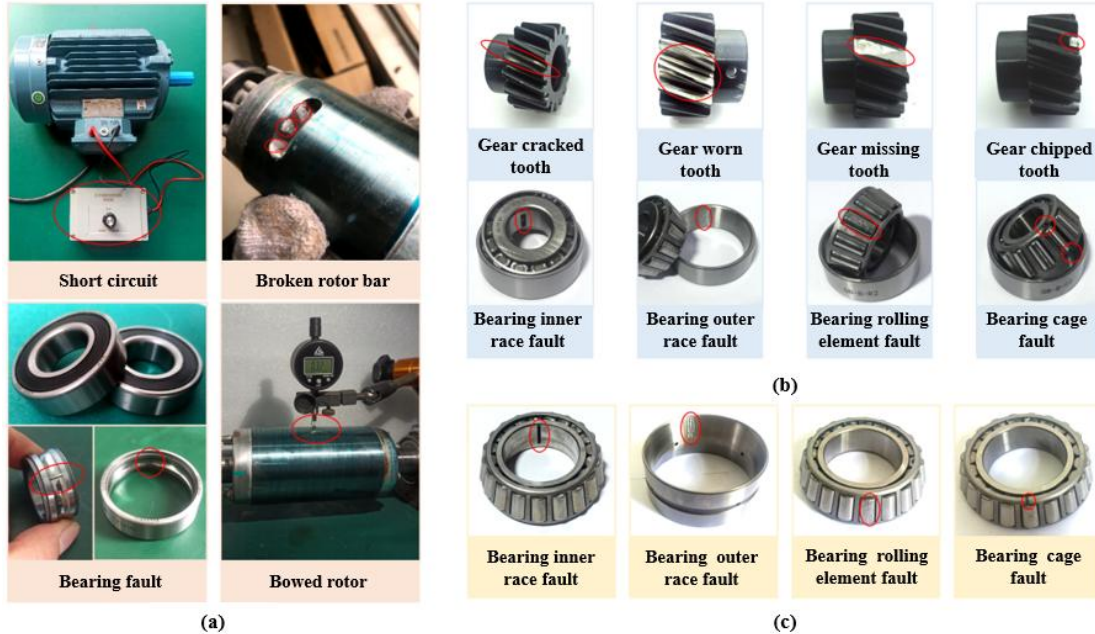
Photographs of fault simulations. (a) Motor. (b) Gearbox. (c) Axle box
